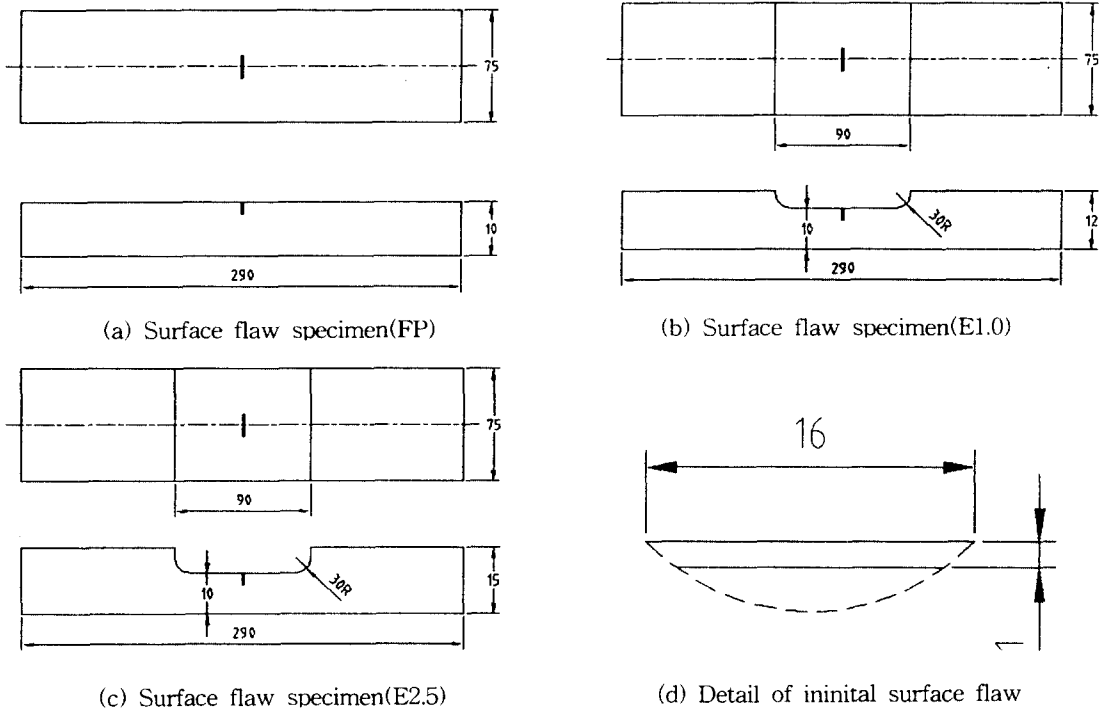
Configuration of fatigue test specimens with a surface flaw (unit : mm)
